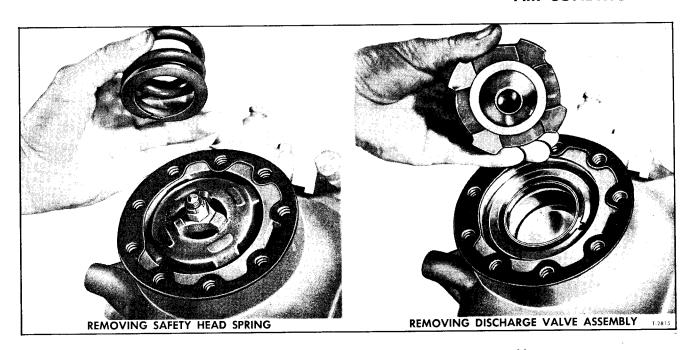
Removing Safety Head Spring and Discharge Valve Assembly
